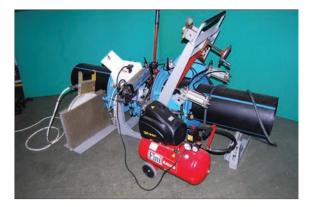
Installation with pneumatic drives for butt welding of polymer pipes of manufacture of the E.O. Paton Electric Welding Institute of the NAS of Ukraine
